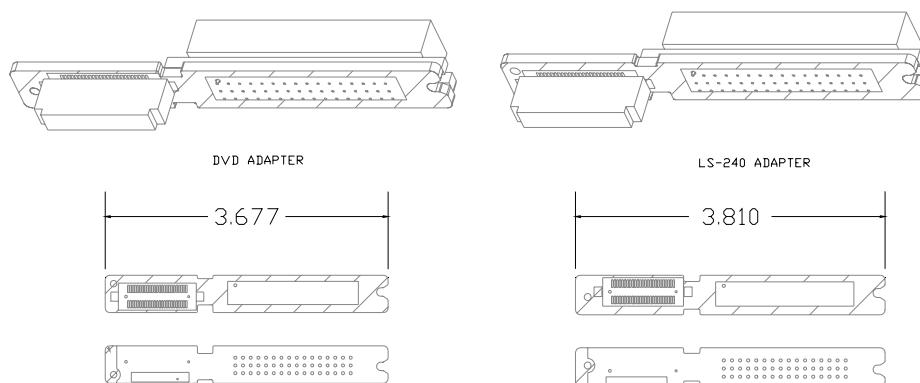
Mechanical Outline of Peripheral Adapter Boards
